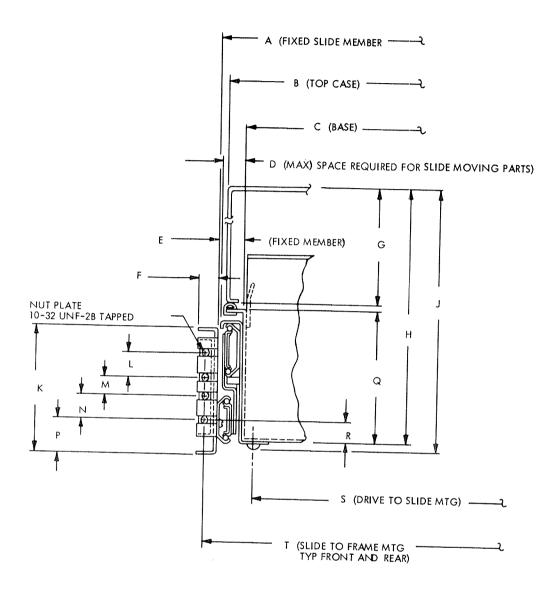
Rack Mounting Details (with or without slides) (Sheet 1 of 2)
